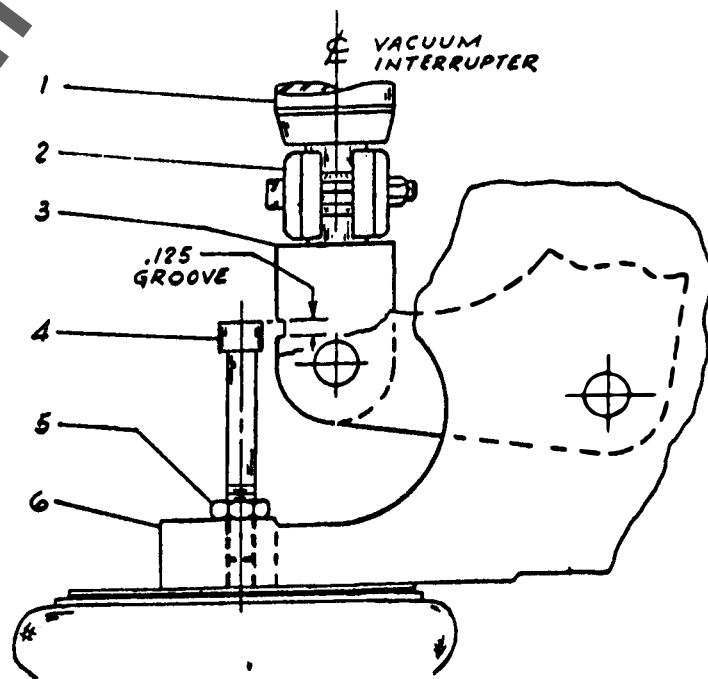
EROSION INDICATOR (BREAKER CLOSED)
